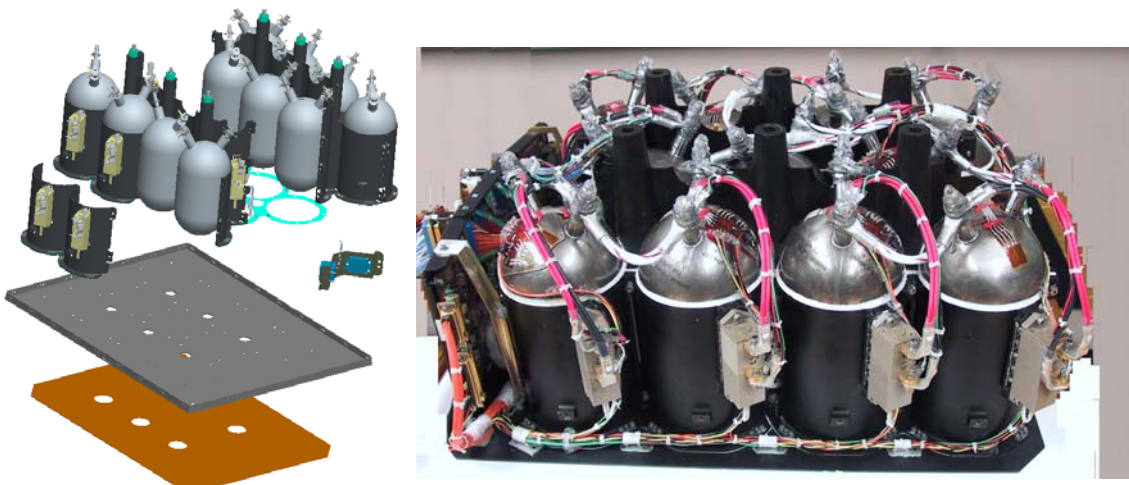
MESSENGER Flight Battery with an Exploded-view Drawing
